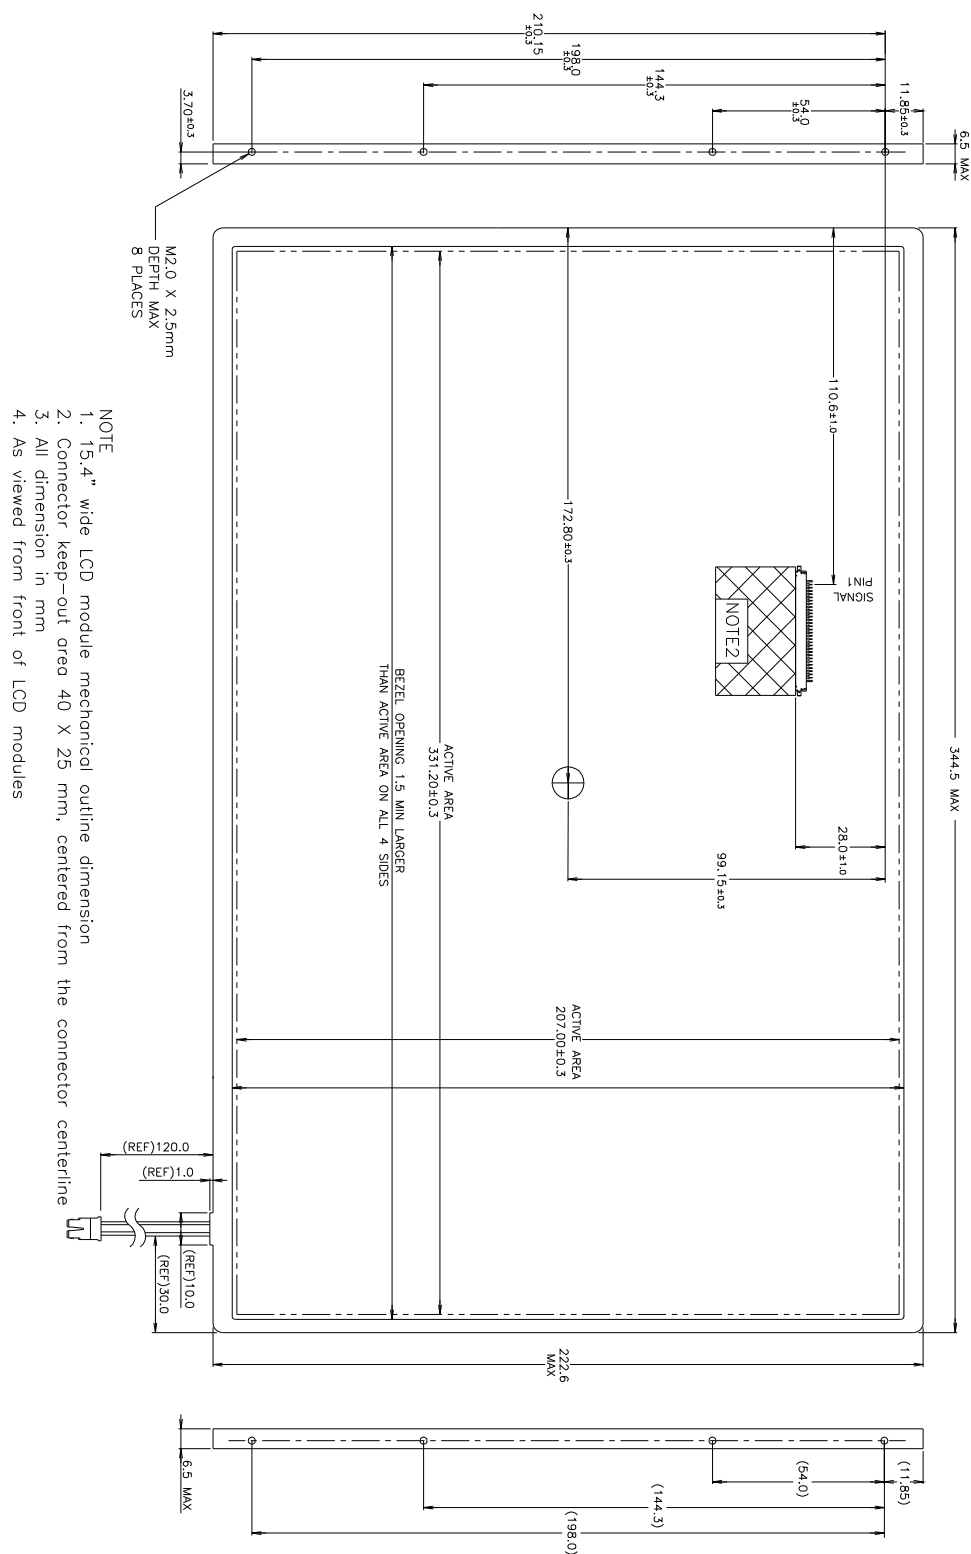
15.4-inch Wide Single CCFL Mechanical Outline Dimension (Front View)
